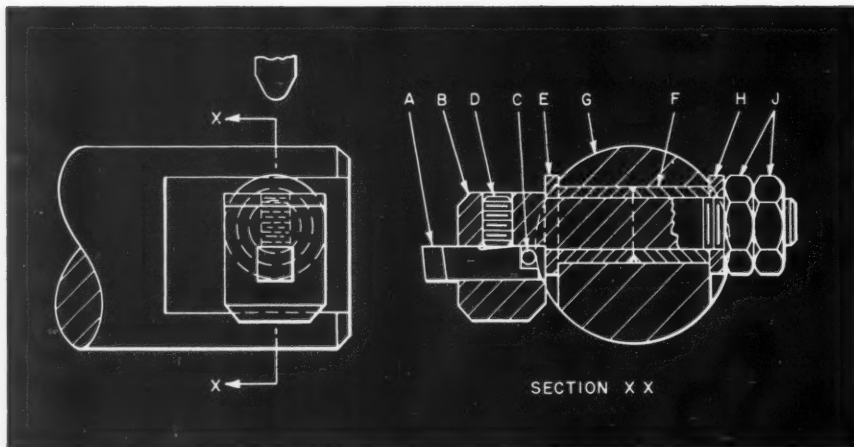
Details of a swiveling tool-holder which permits the top cutting face of tool bit (A) to remain perpendicular to its path of travel
